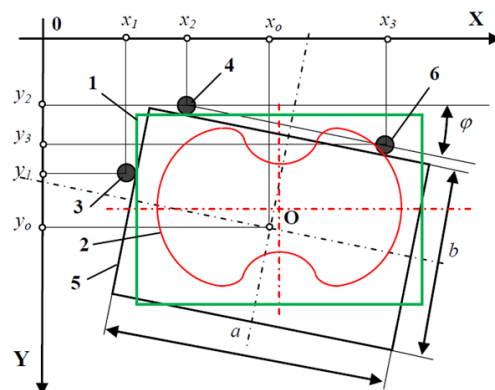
An example shows the search for the initial orientation of the workpiece [3]
